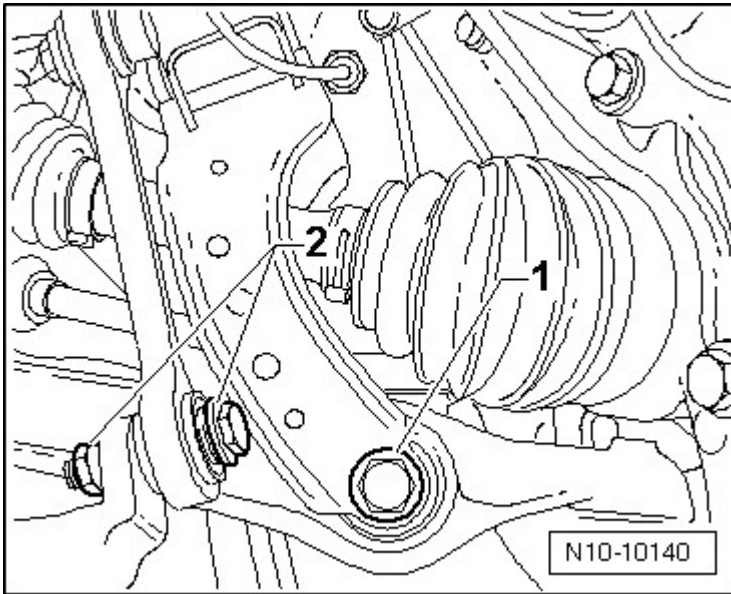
Identifying Right/Left Lower Bolt On Stabilizer Bar
